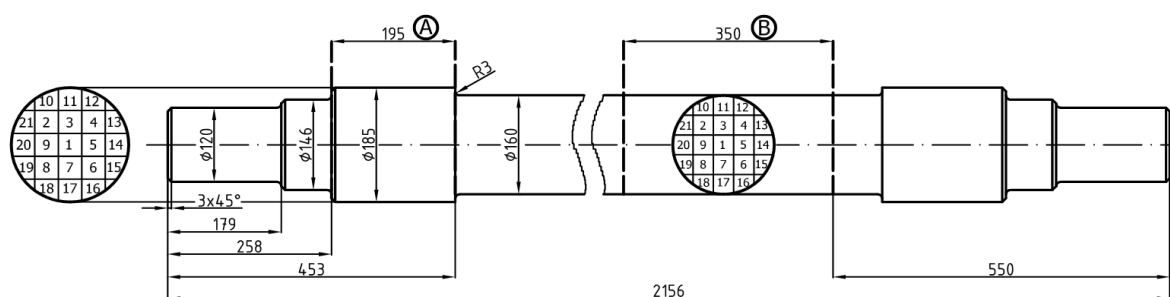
Drawing of the tested railway axle and sketch of machining positions of the specimens.
